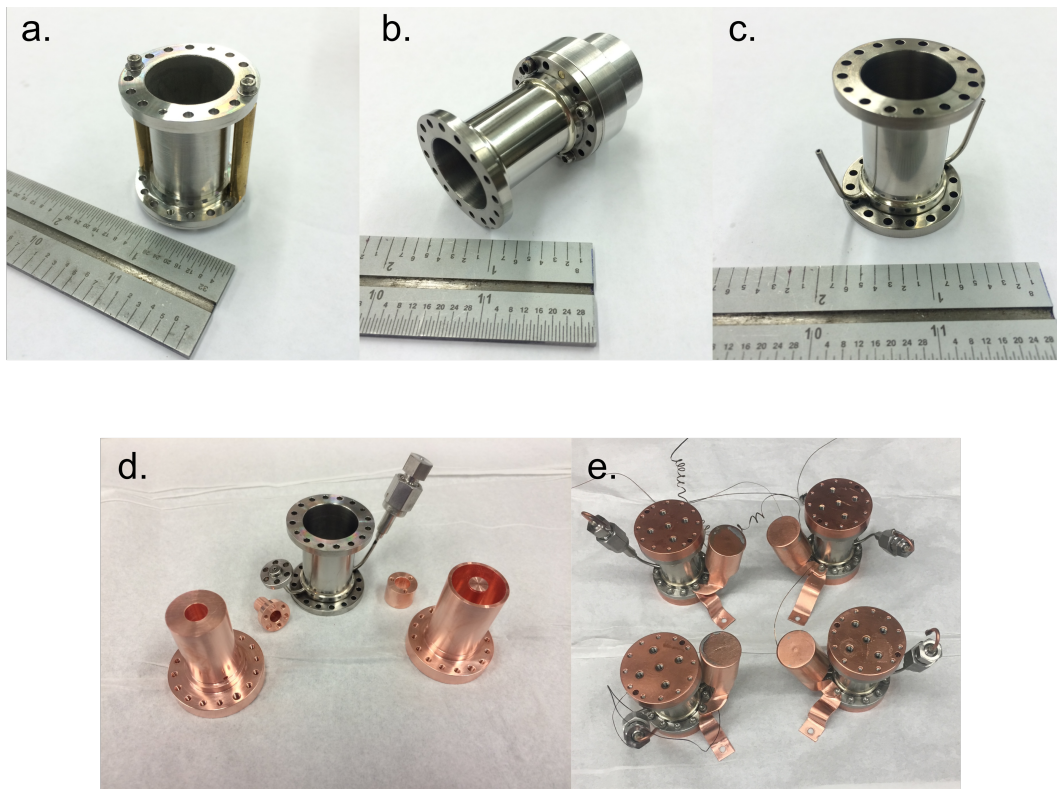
Pictures of manufactured parts and steps of construction for gas-gap heat switch: (a) shows a SS shell assembly jigged for silver brazing. Brass posts ensure that the end-flanges remain parallel to one another while undergoing heating. (b) shows a brazed shell on a mandrel to undergo post-braze machining to finalize the dimensions and ensure parallelness and concentricity. (c) shows a nearly complete shell with the fill and adsorber tubes in place. (d) shows the complete finalized parts for a version 1 THeIA switch (now in Breton), while (e) shows four version 2 switches following construction and testing.
